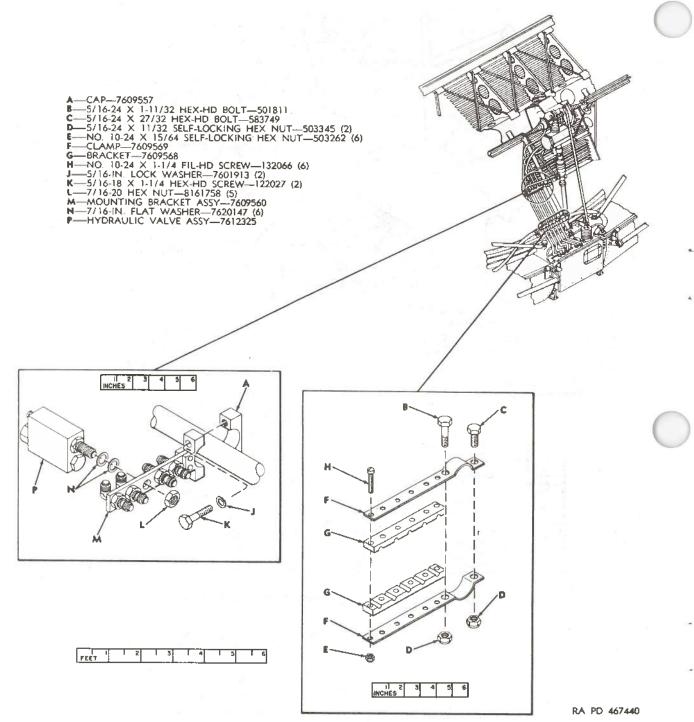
Removal and installation of mounting bracket assembly, clamp, and hydraulic valve assembly.
